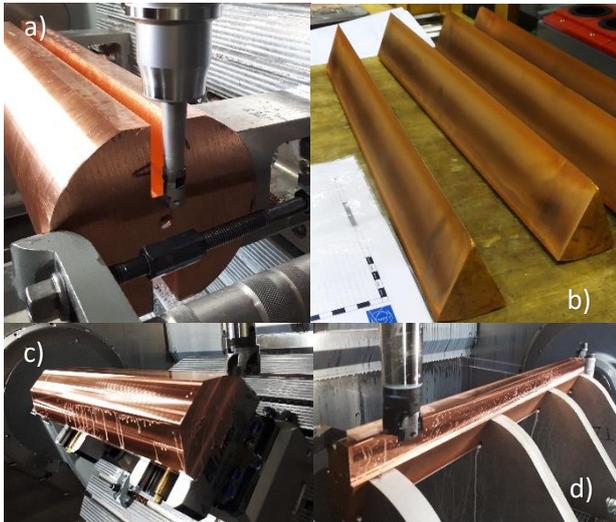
Different phases of pre-roughing process; a) First milling in massive bars; b) Material after wire cutting; c,d) Machining of external surfaces with 1 mm allowance.
